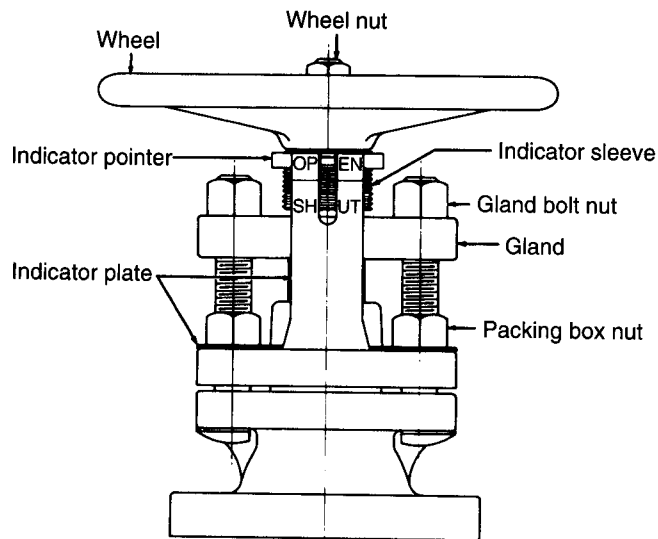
Valve-position indicator. Courtesy Crane Company.
